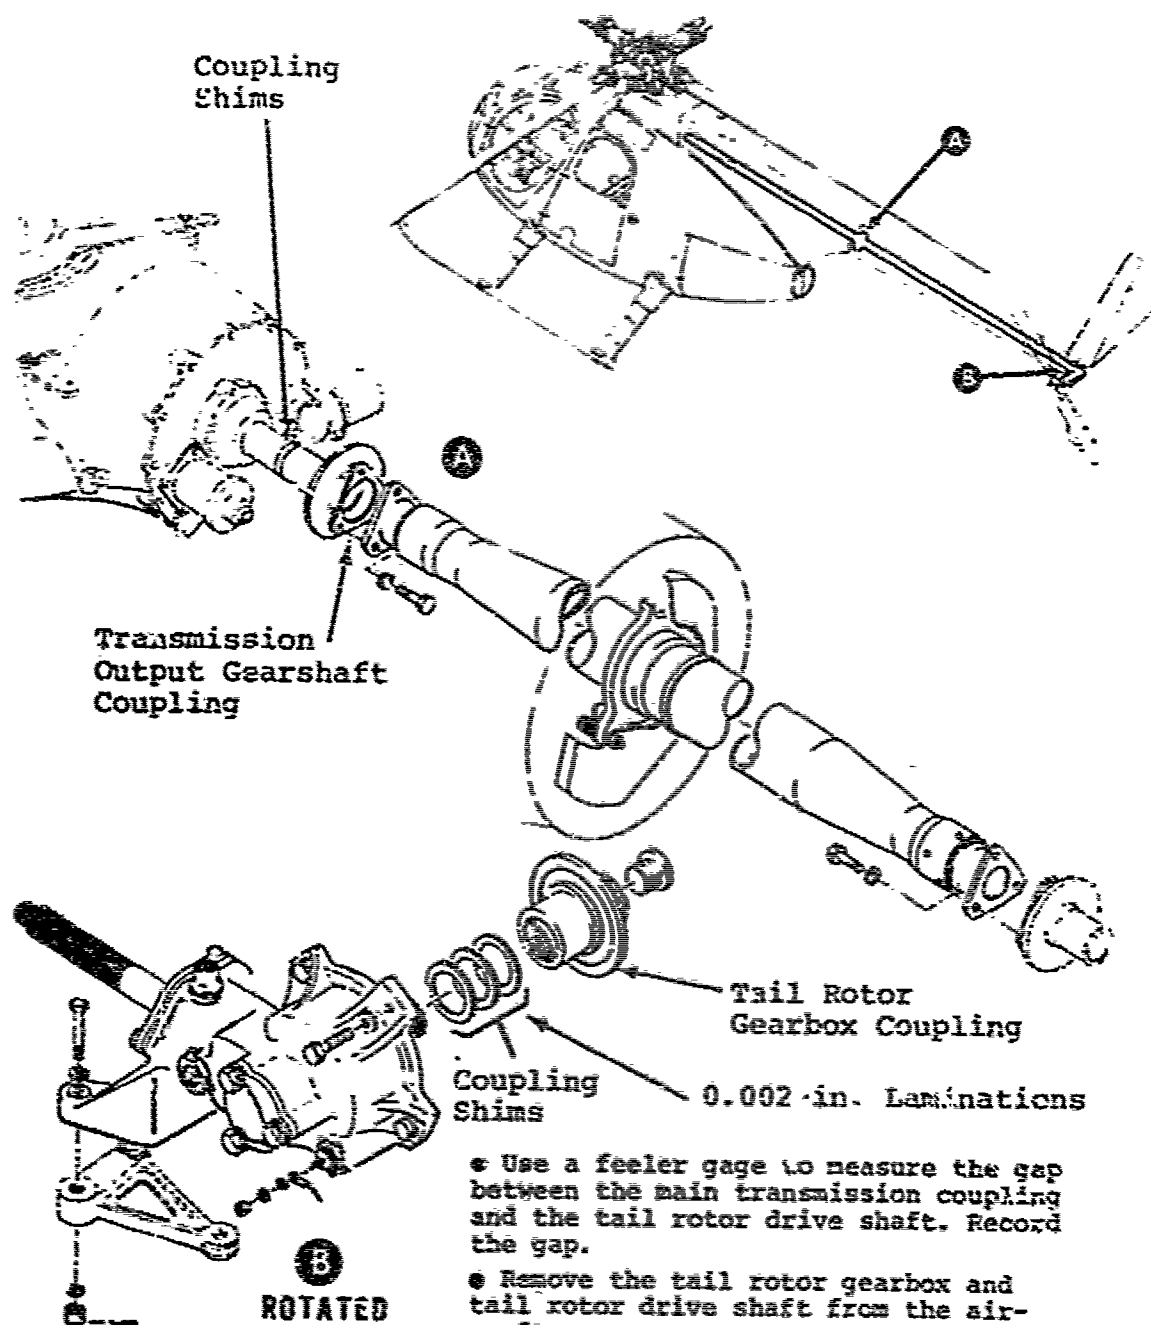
Rotor Drive Shaft-to-Hub Attachment, OH-6 Helicopter.
